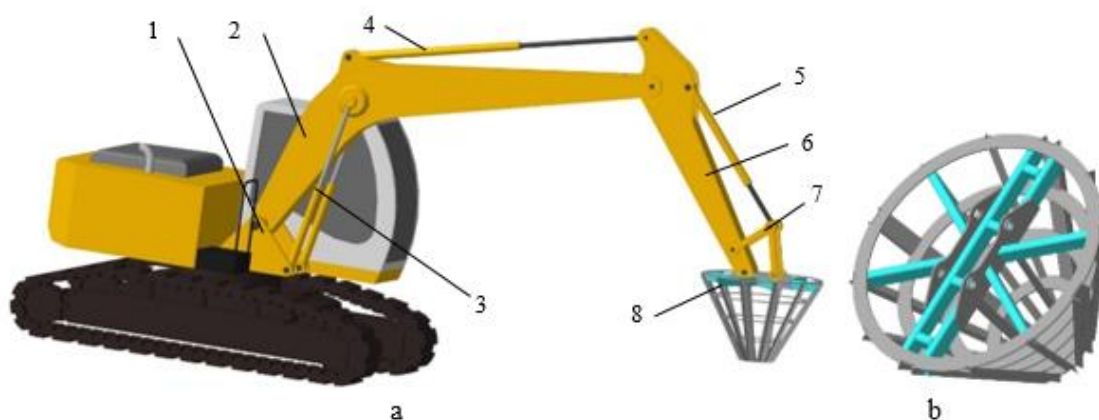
General view of an excavator with an attached working body for removing the damaged soil from the inside layer of the craters (a), and a general view of this working body (b):
